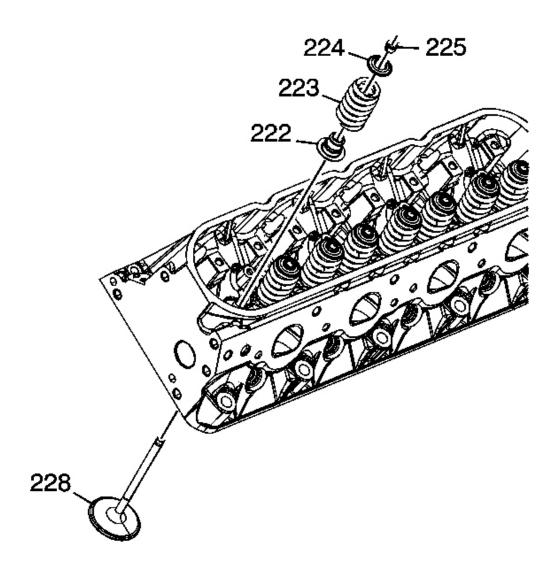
Valve & Valve Spring Courtesy of GENERAL MOTORS CORP.
